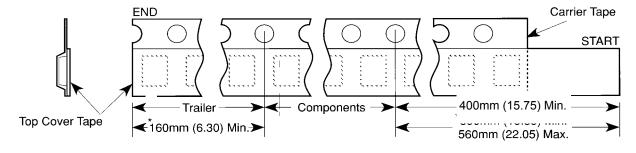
Tape Leader & Trailer Dimensions (Metric Dimensions Will Govern)
